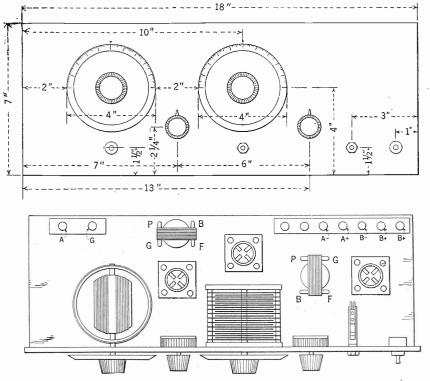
, (top) the panel layout for the reflex, with the panel placement of parts shown and important distances gauged. Fig 3, lower, is the constructional layout. Note that the audio transformers are at right angles. A separate aerial-ground terminal block may be used, as shown.
